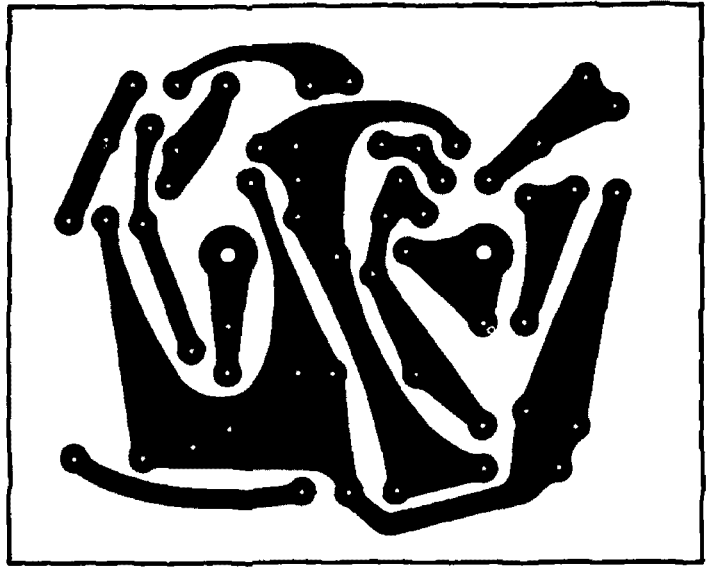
Printed circuit for the 5-mA S-meter. Component layout is shown in fig. 7.
